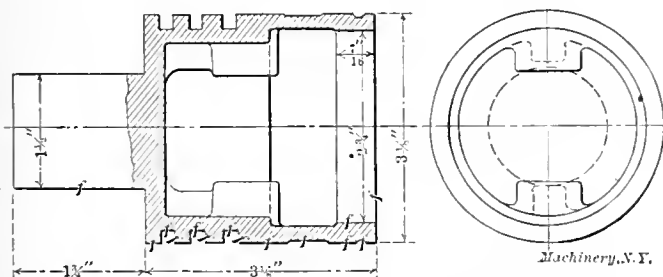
Piston finished on a Cleveland 2-inch Automatic Screw Machine.
